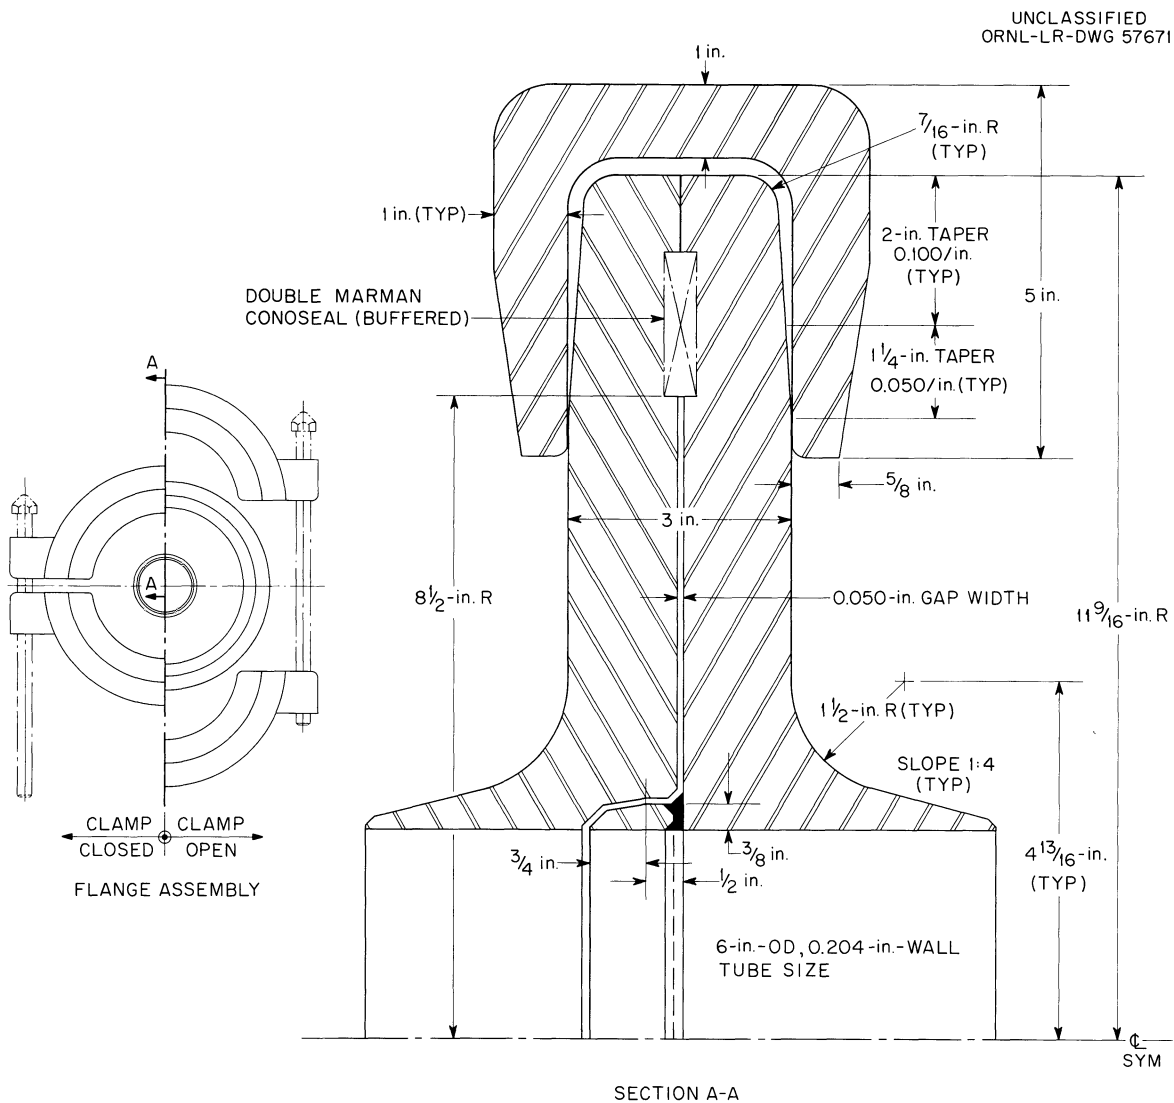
6-in. Molten-Salt Freeze Flange.
